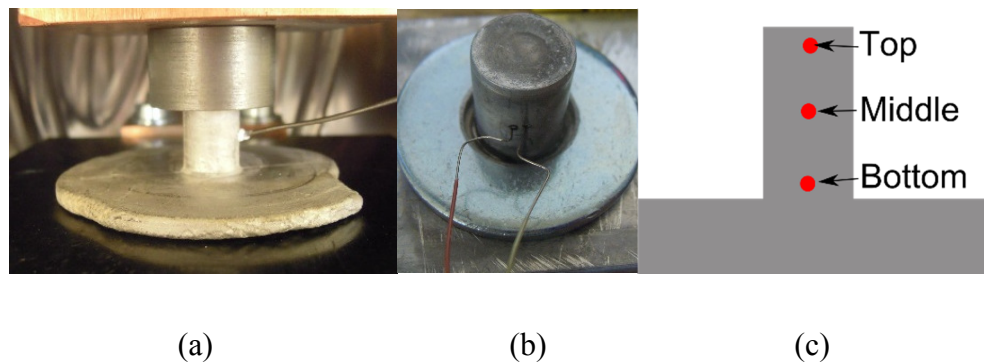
Thermocouple mounted inside a protrusion (a). Thermocouple welded to the surface of a protrusion. The thermocouples were mounted at three different locations (b).
